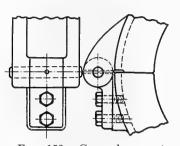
Cover lugs cast integrally, and pivot pins fastened in loose piece for greater span.
